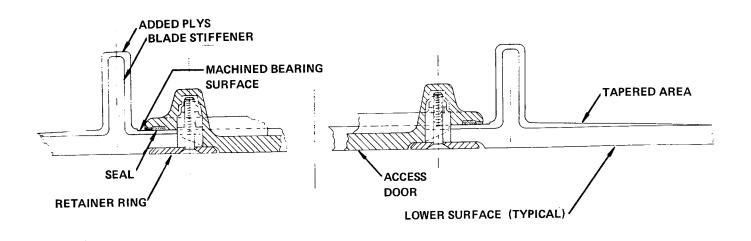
Typical Clamp-Type Wing Lower Surface Access Door
